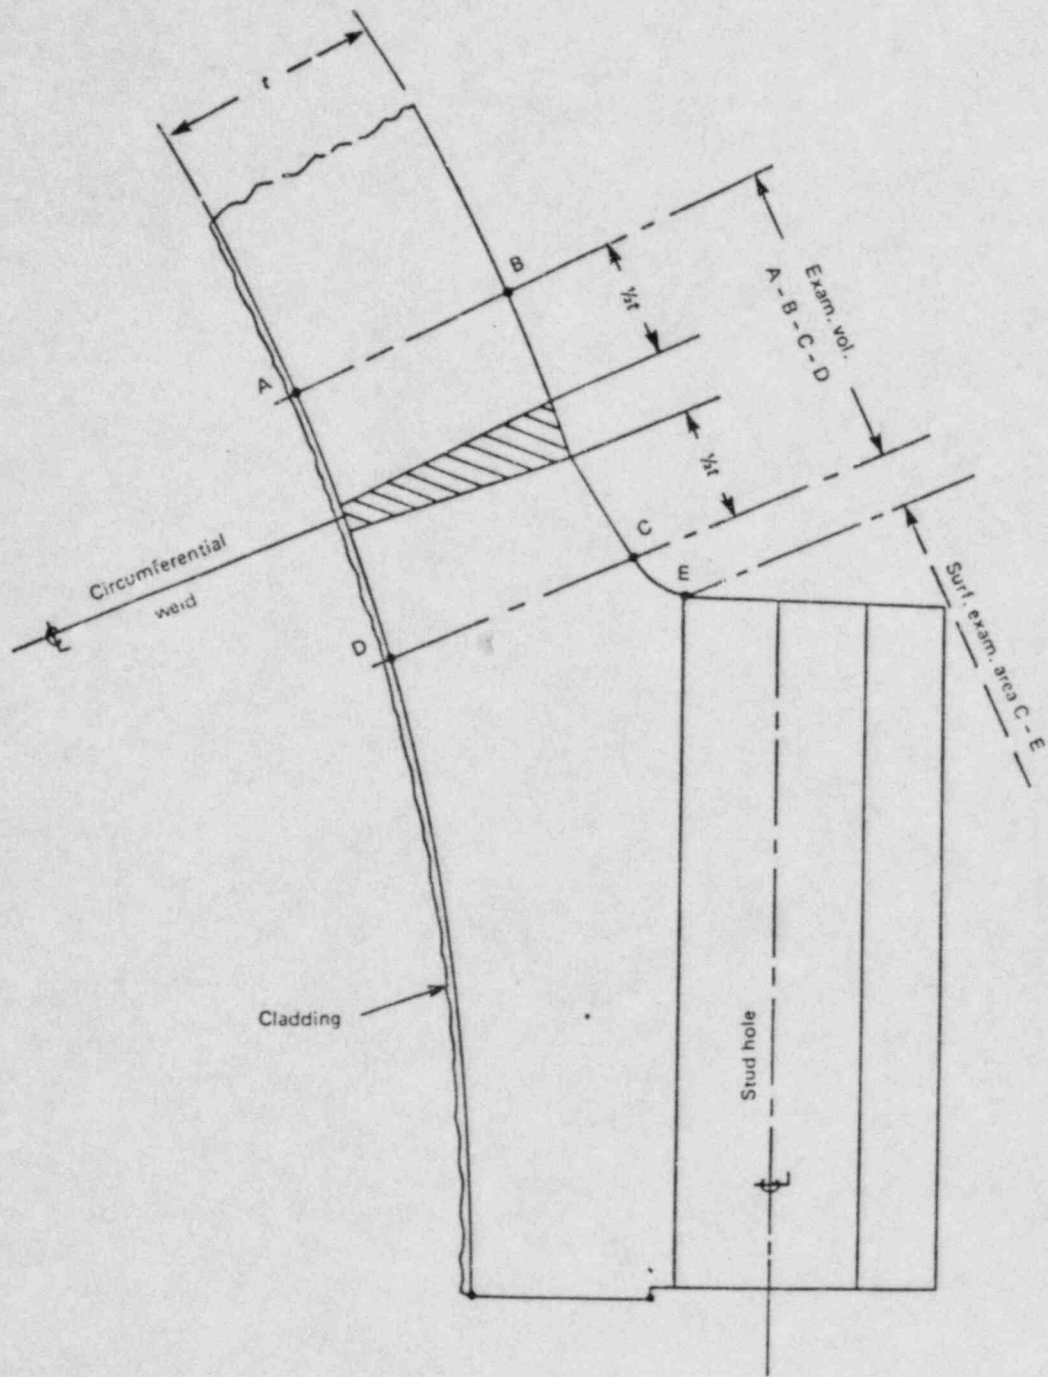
HEAD-TO-FLANGE WELD JOINT
